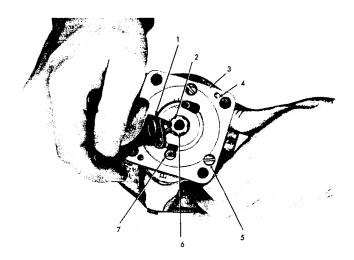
Removing Ballhead Shaft Snap Ring (T-35117)
